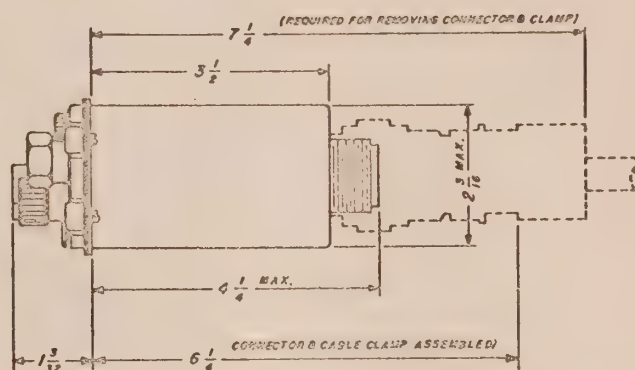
B. Radio Set Control C-733A/ARR-15A, Outline and Mounting Dimensions
